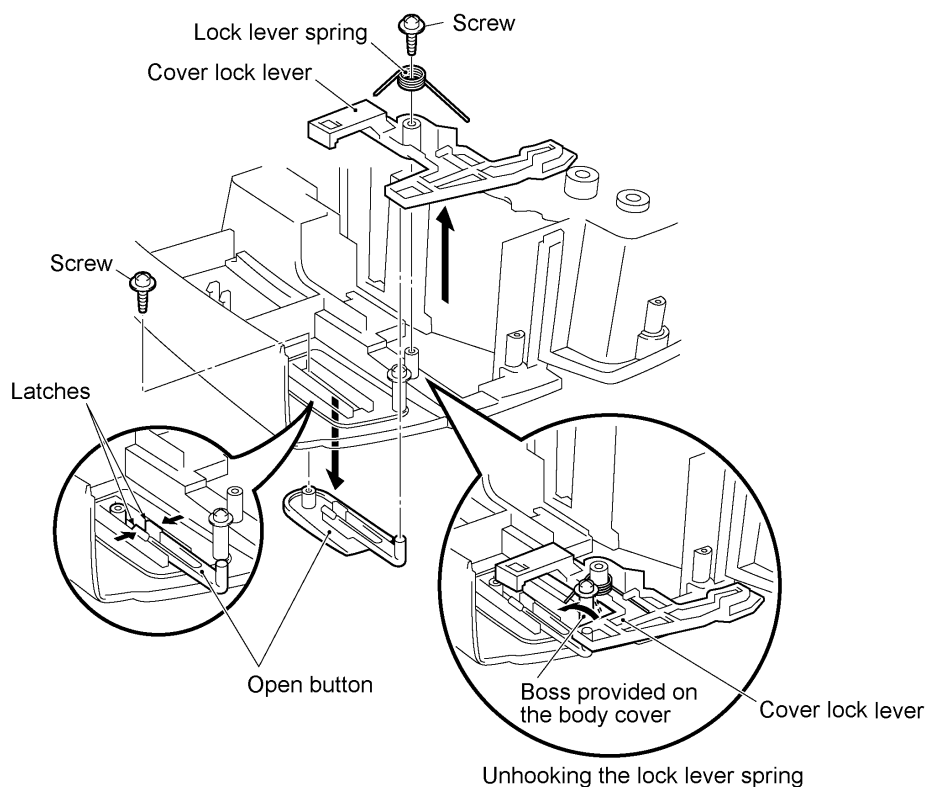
Removing the Cover Lock Lever and Open Button
